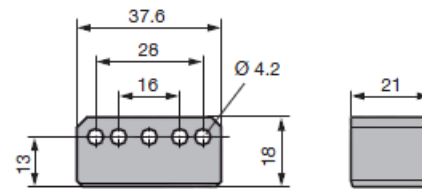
Installation dimensions of BTL6-A-3801-2 magnet
